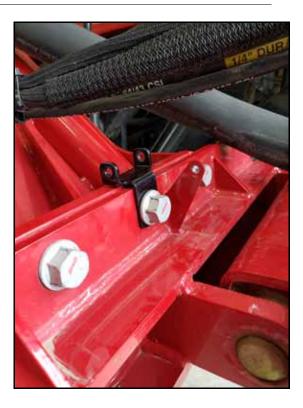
Left Boom Tilt Sensor Mounting Location
